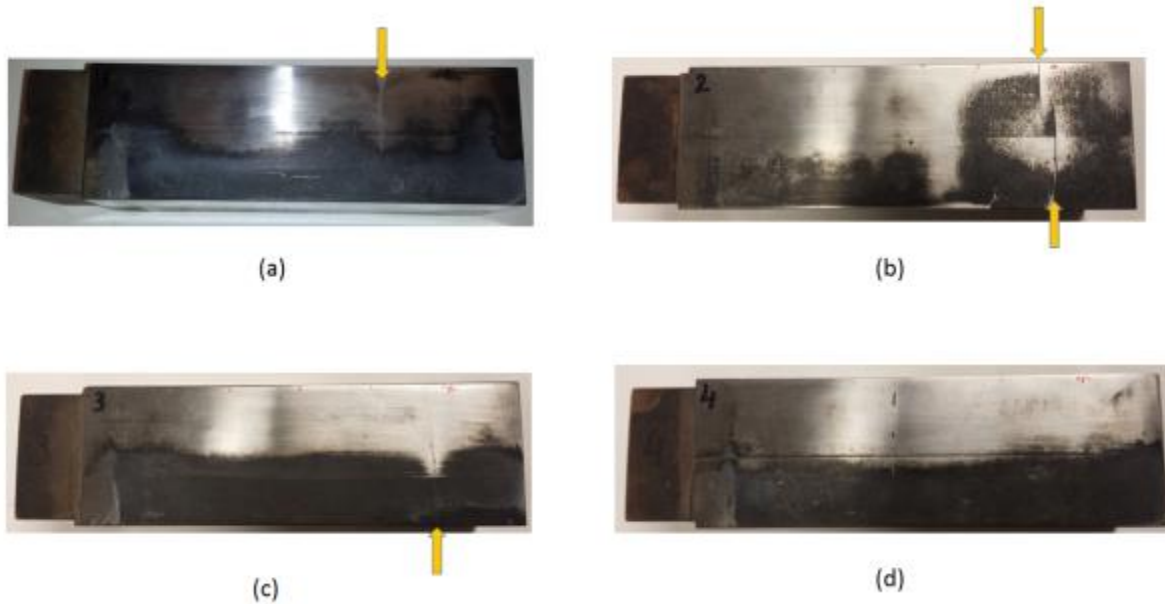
Bimetallic thermal fatigue test specimen subsequent to testing, showing cracks that developed: (a) NIU Side 4, (b) NIU Side 1, (c) NIU Side 2, (d) NIU Side 3.
